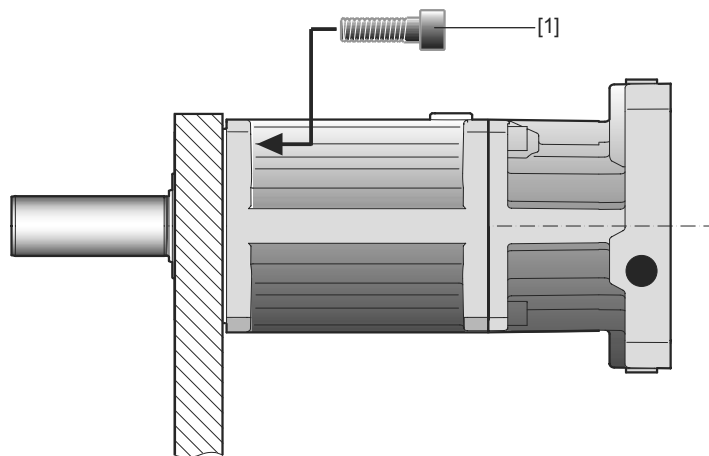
Installing the PSF.. planetary servo gear unit in the machine 57488AXX
